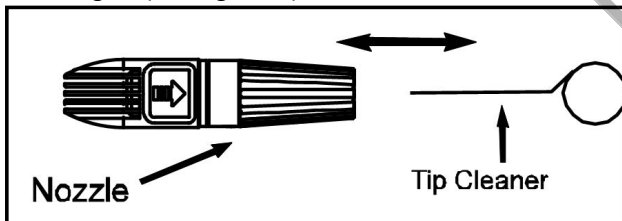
Insert tip cleaner in nozzle hole and move it back and forth until debris is dislodged
